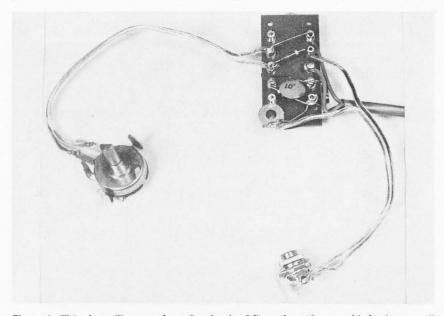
This photo illustrates how the circuit of figure 1 can be assembled using a small turret terminal board. The transistors and R5 are mounted out of sight on the rear side of the board.
